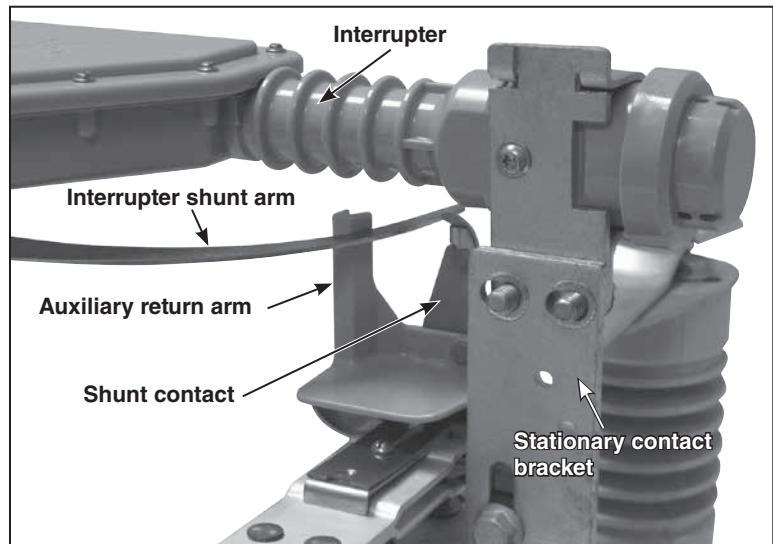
Align the replacement interrupter with the holes on the bracket. Make sure the shunt arm is between the auxiliary return arm and the shunt contact.
